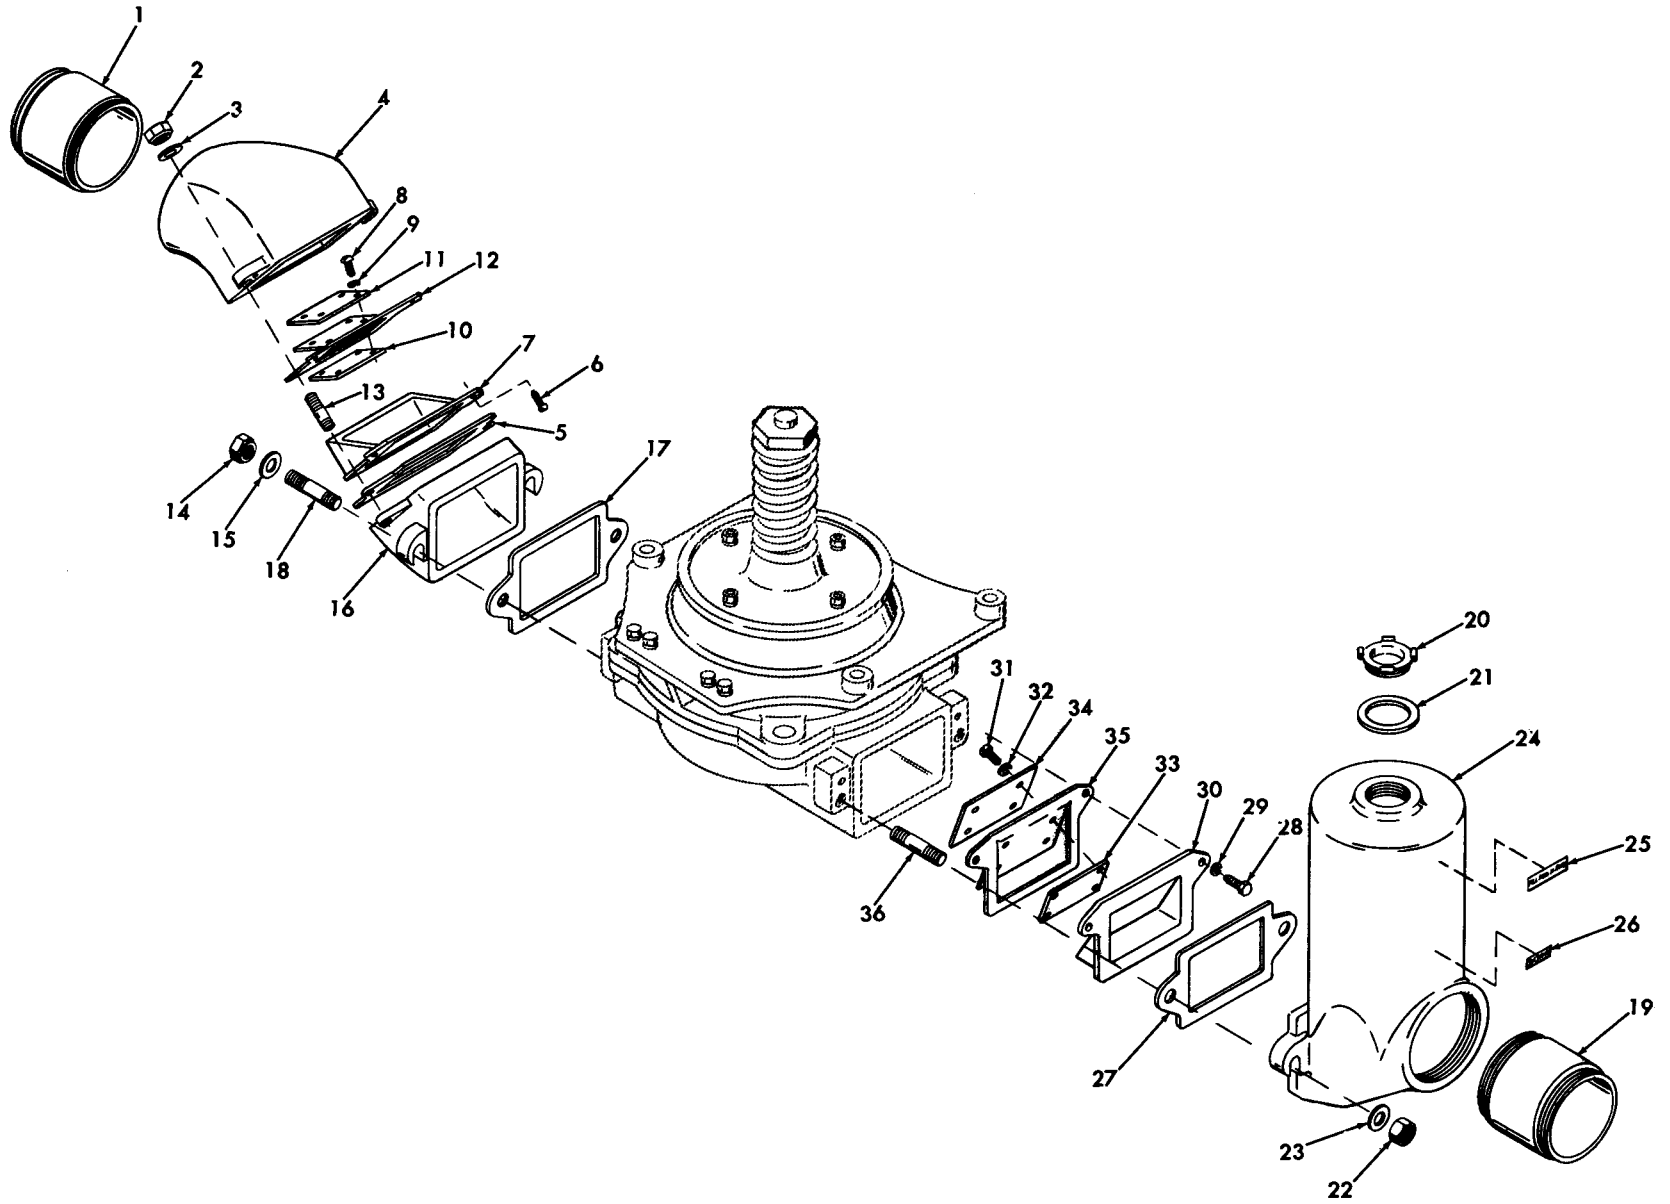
Suction and discharge systems, disassembly and reassembly.
